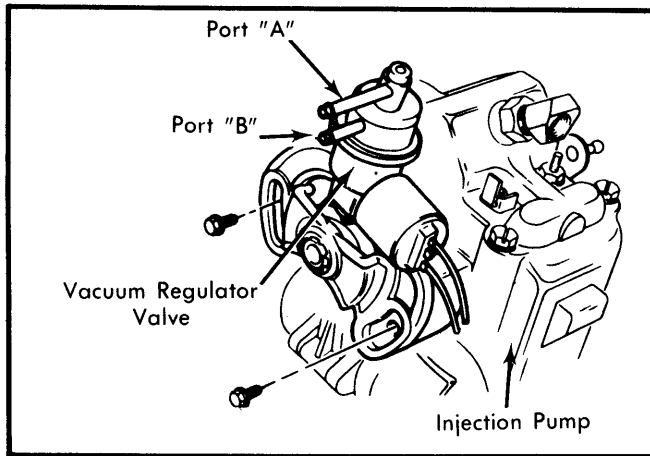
Vacuum Regulator Valve On Diesel V8 & V6 Engines
